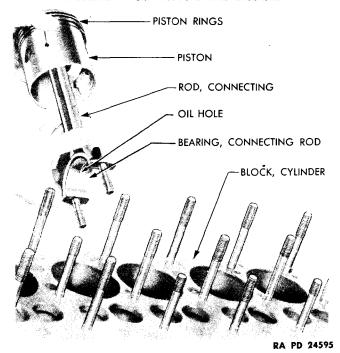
Showing Proper Position Of Connecting Rod In Cylinder
